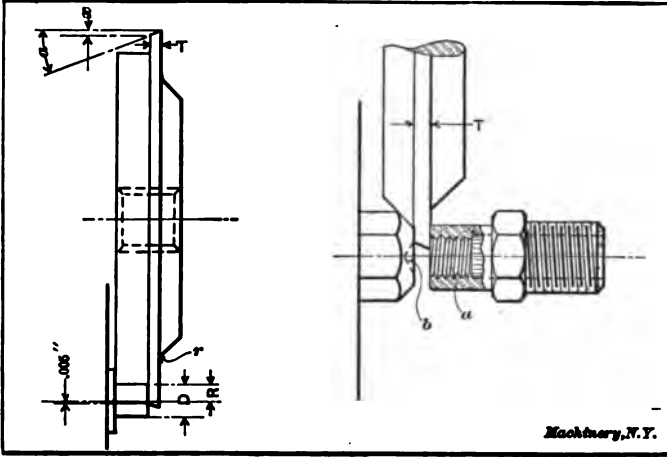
Diagram showing Dimensions of Circular Cut-off Tool when it is used both for cutting-off and forming part of the Work
